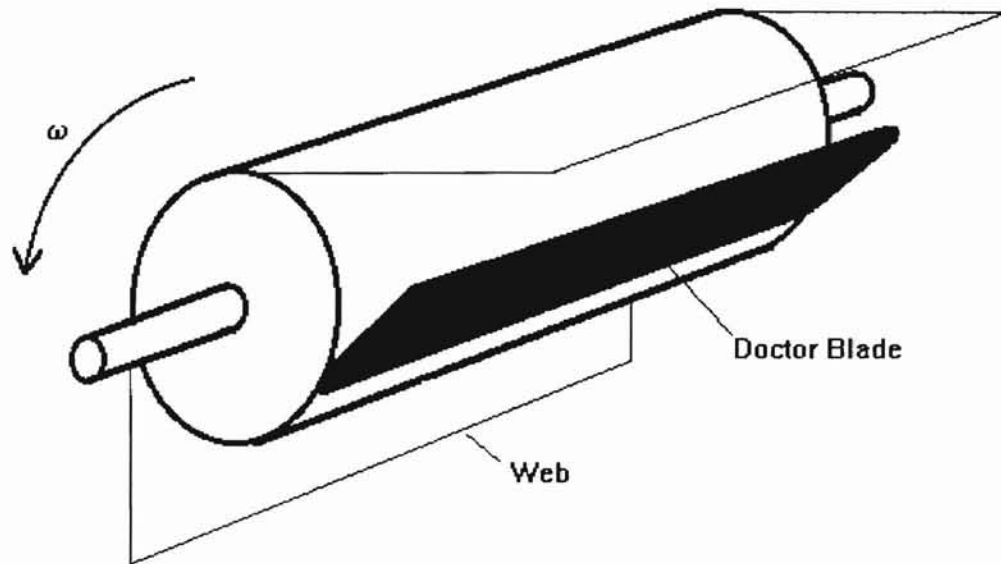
Positioning of Doctor Blade on Drive Roller
